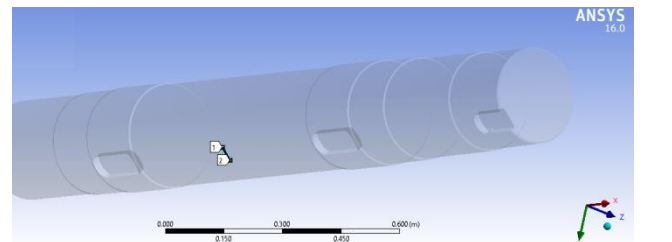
Modified Shaft Design 3 with Materials EN24 Fracture Analysis-J Integral
